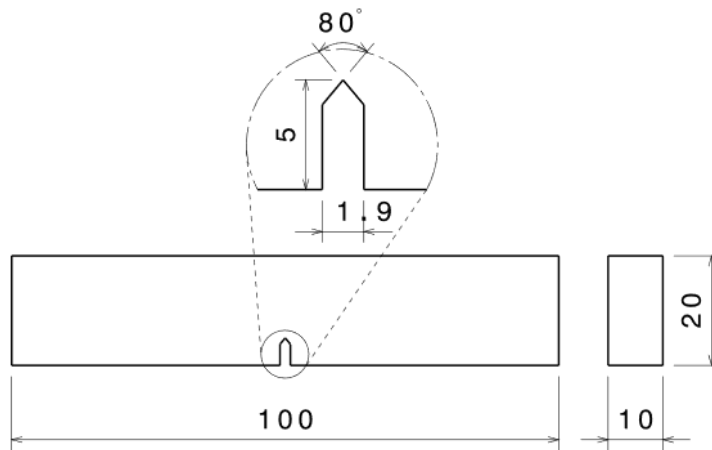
Dimensions, in mm, of fracture toughness specimens of the resin.
